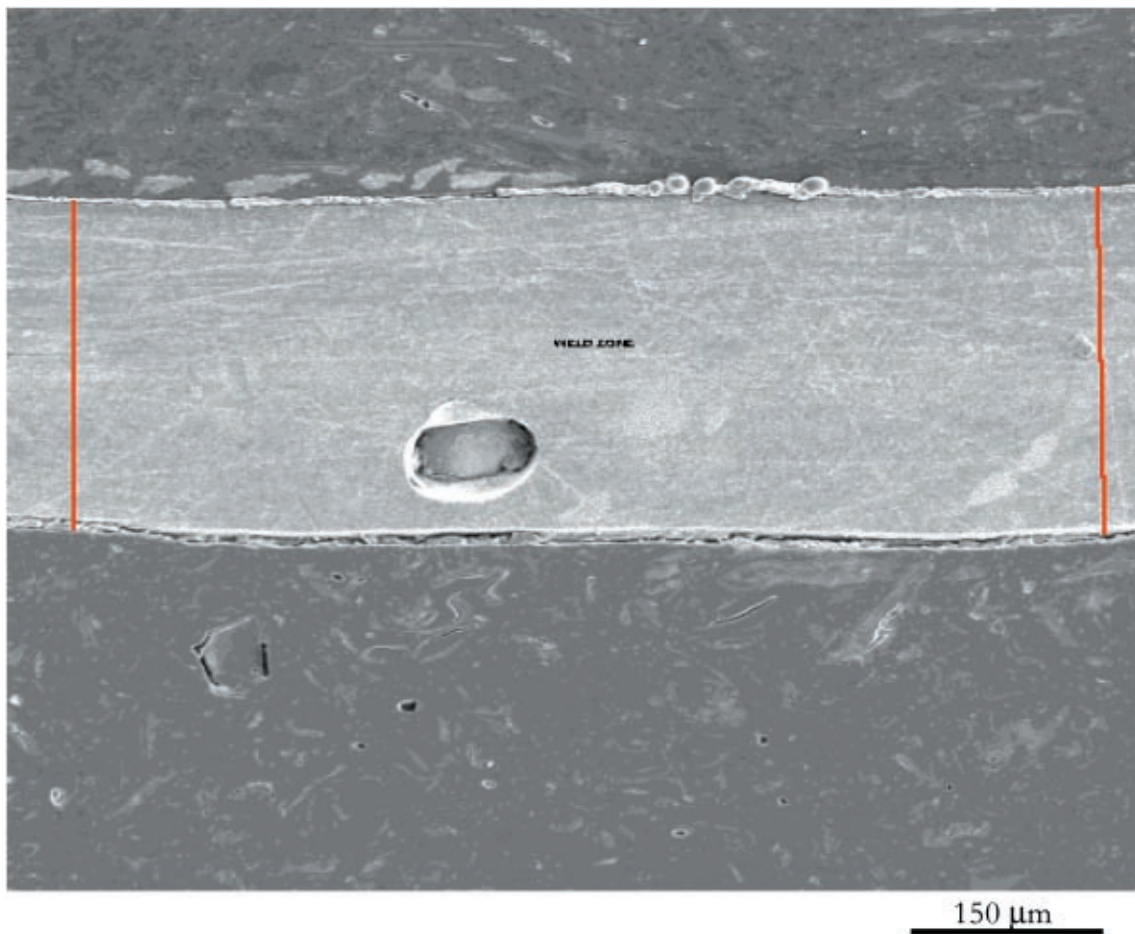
Transverse section of the YAG weld. Note the presence of a large pore.
